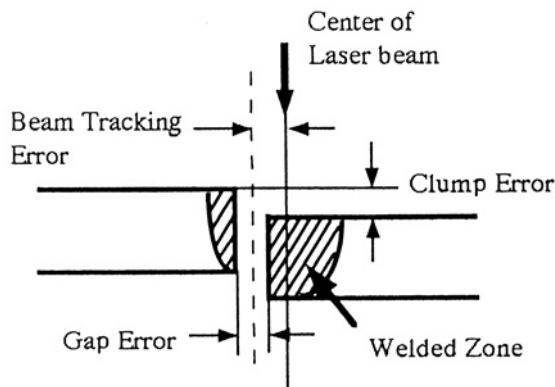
Schematic diagram of butting errors in the laser welding process
